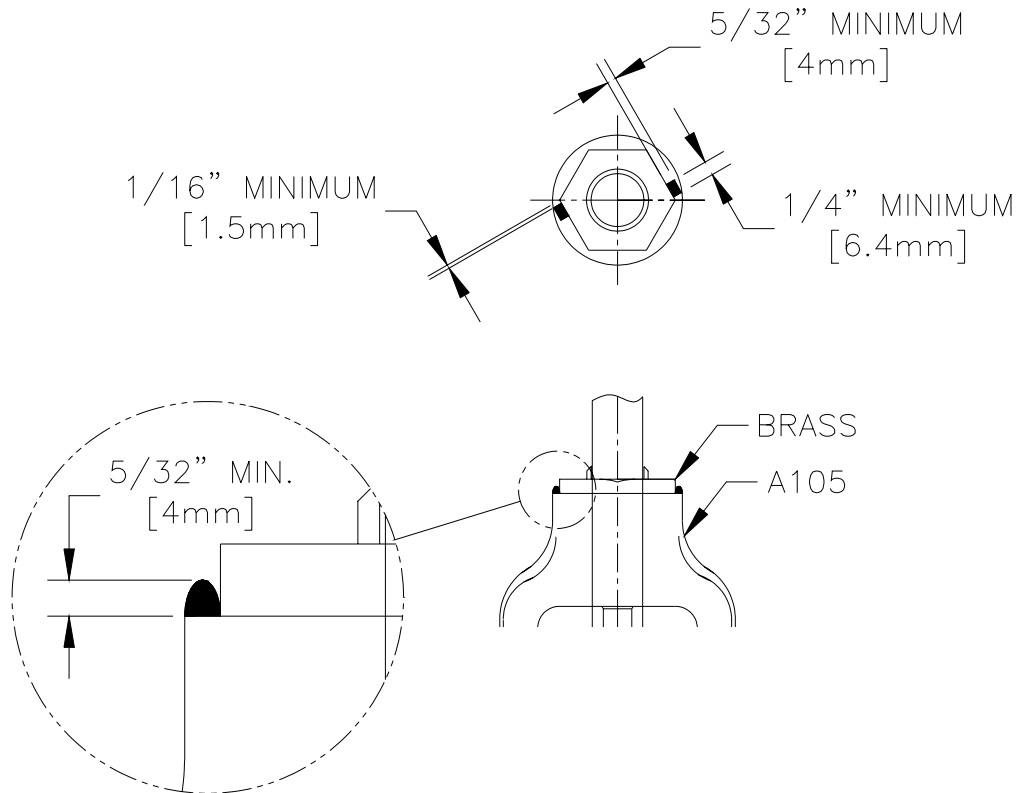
Anti-Rotation Tack Weld Minimum Dimensions and Placement
